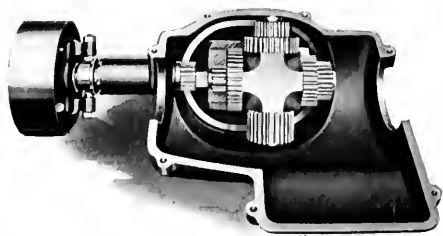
Arrangement of Speed Change Gears on 14-inch Lathe
